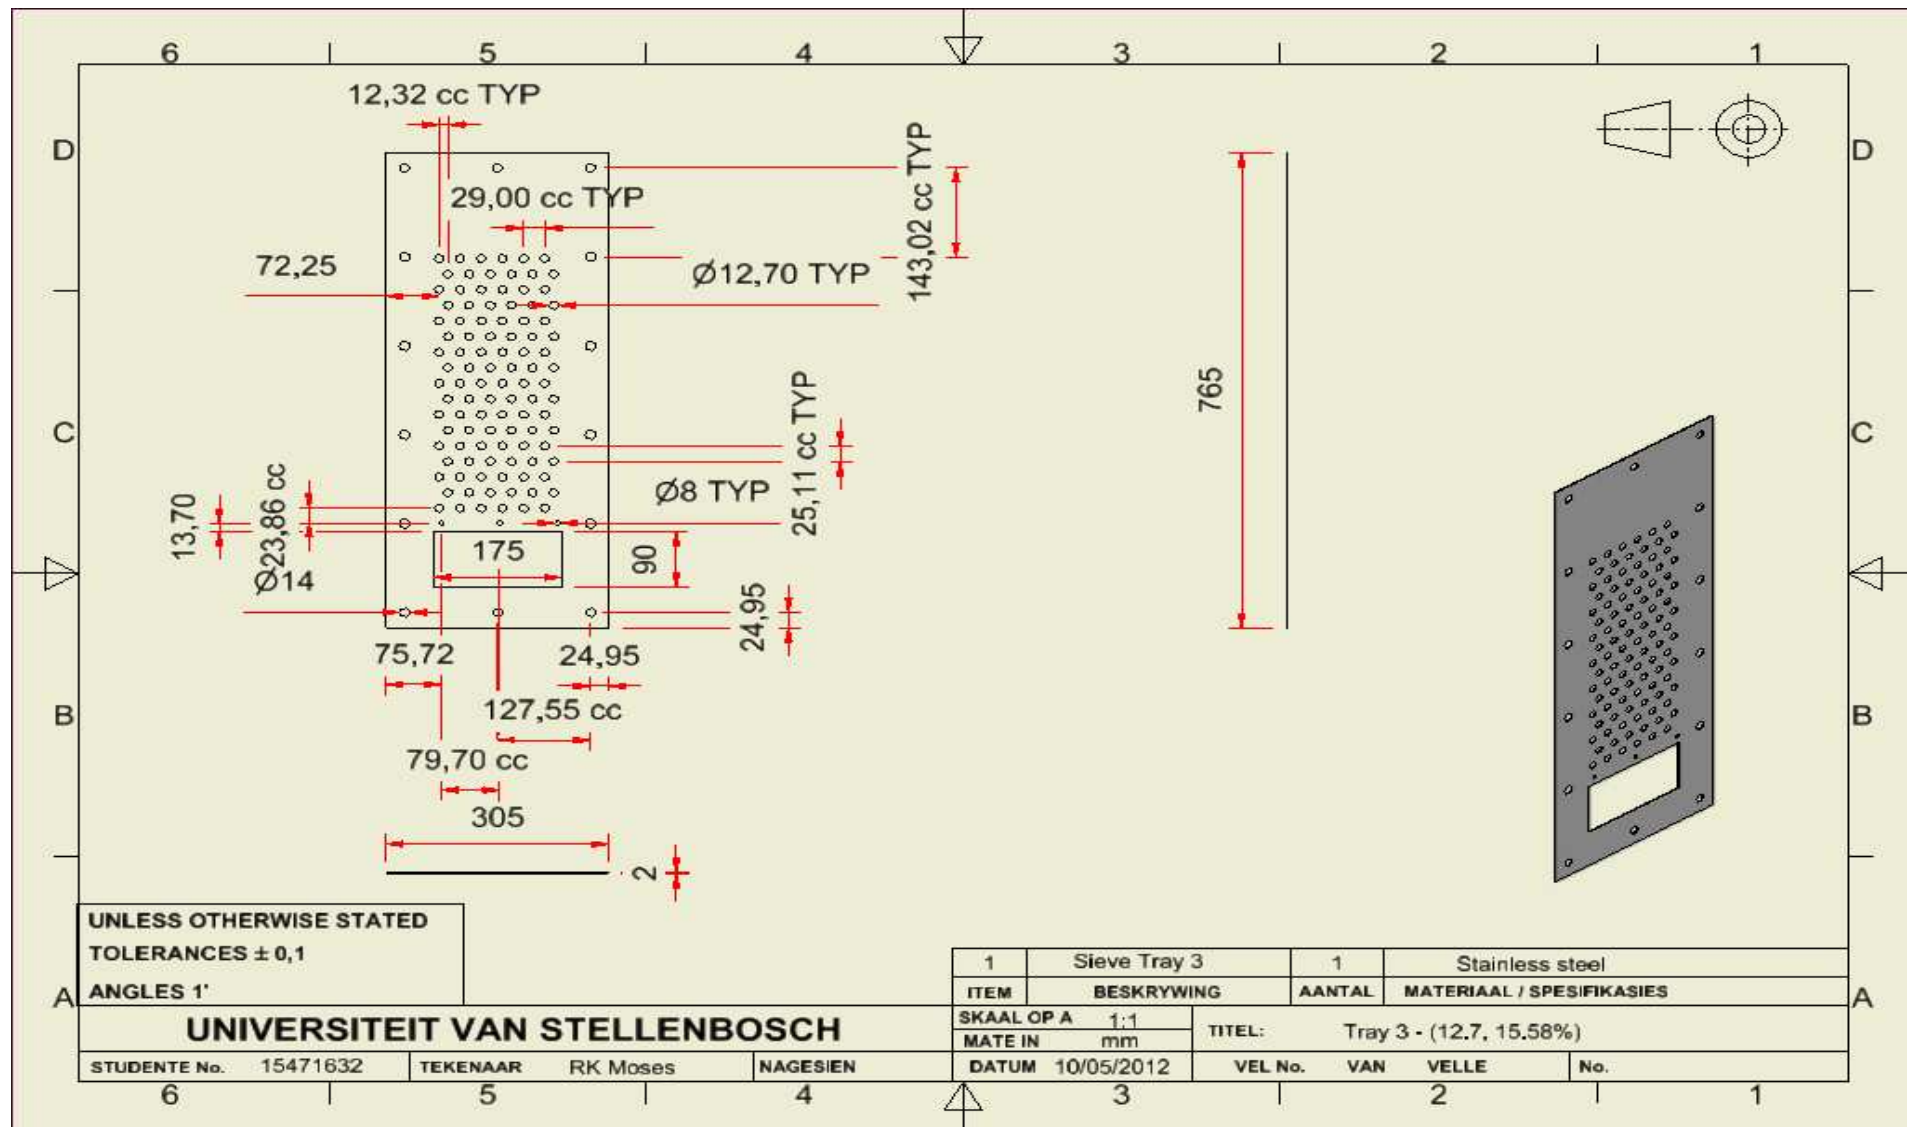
Tray 3 with ½ in. (12.7 mm) hole diameter and a fractional hole area of 15.6%
